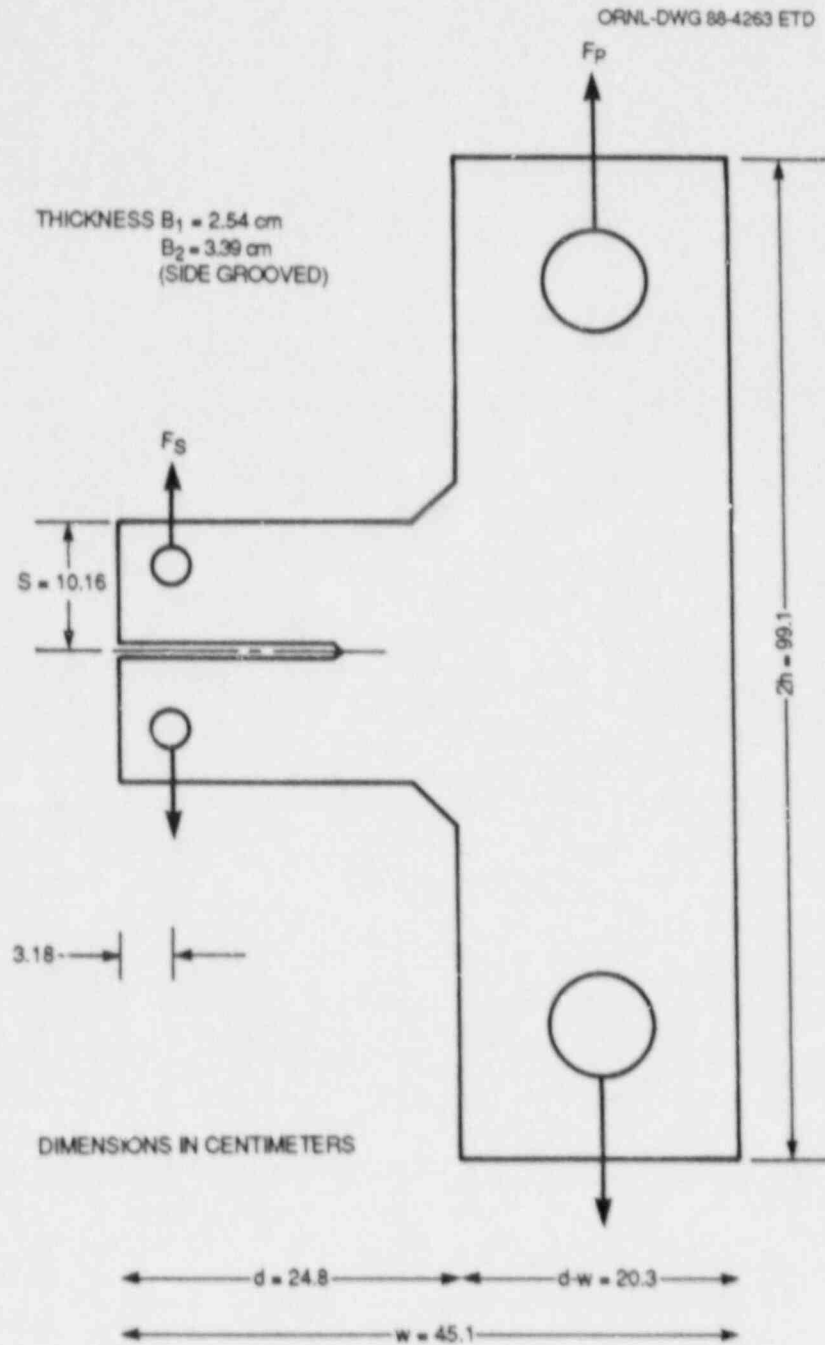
Geometry and loading of stub-panel crack-arrest specimen.
